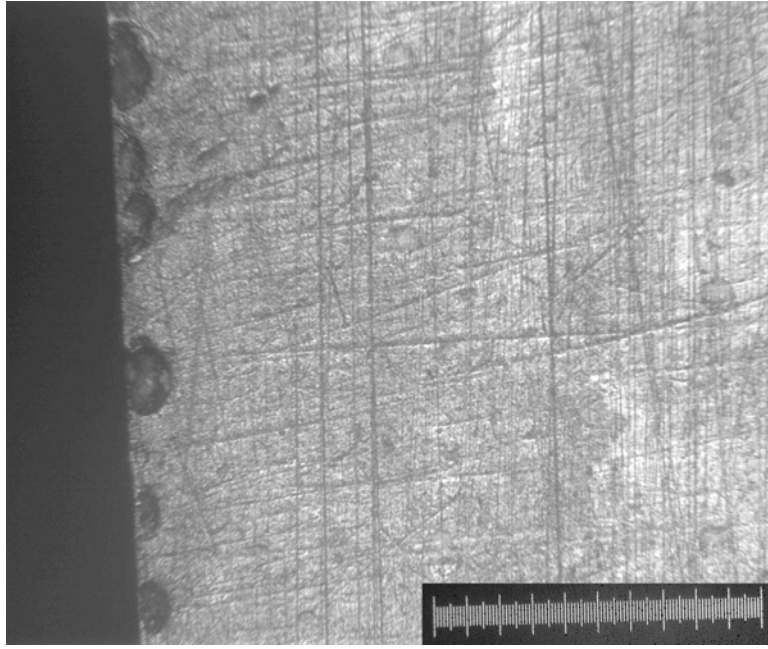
Microstructure of advanced machined process specimen#6 showing the defects caused by milling process at location #1 at magnification 100x
